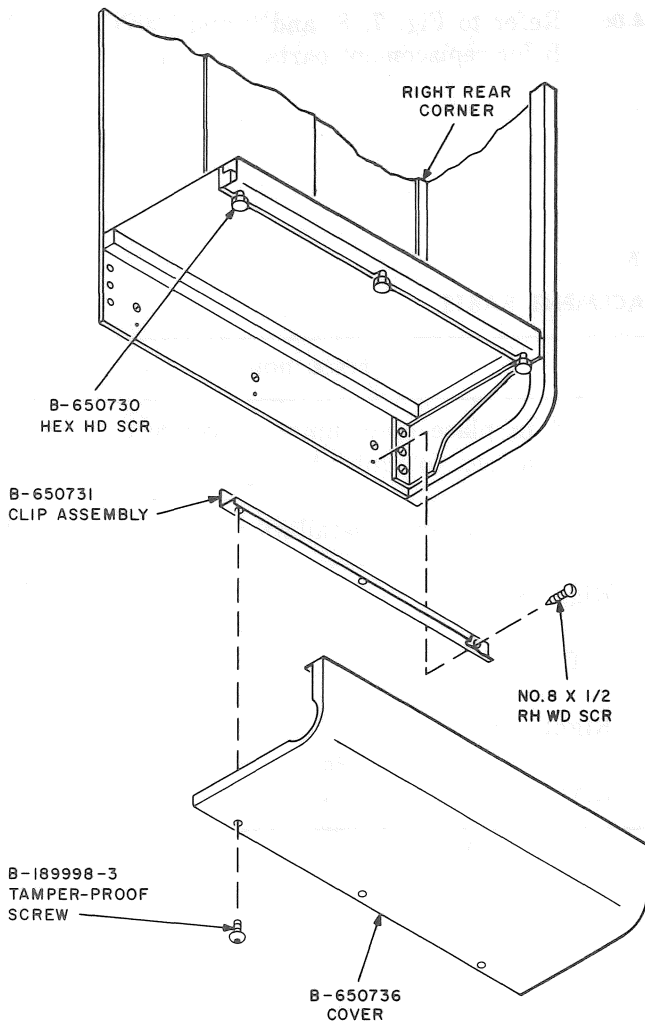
Installation of KS-19267, List 13 Cover Assembly
